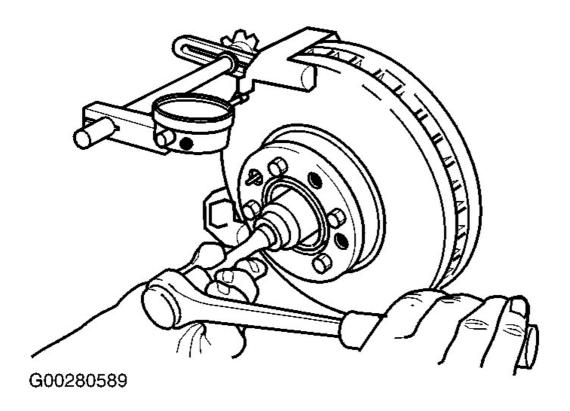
Measuring Brake Disc Lateral Run-Out (Front Disc Shown; Rear Similar) Courtesy of VOLVO CARS OF NORTH AMERICA.
